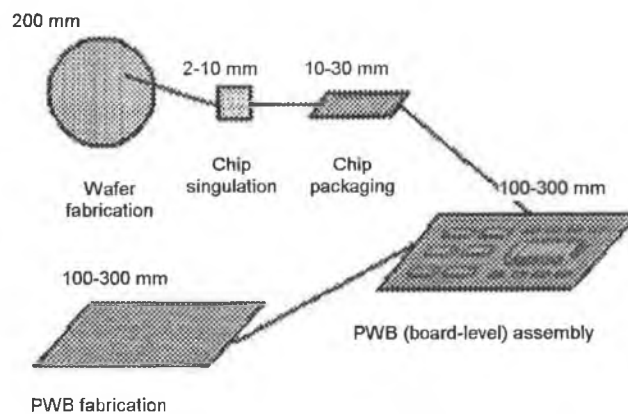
Integrated circuits fabrication steps [Gut01]
